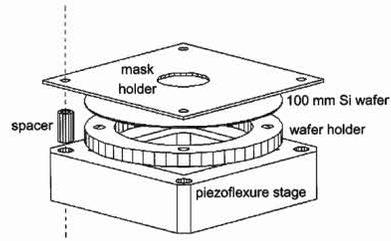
Fixture assembly for nanotranslated stencil mask and substrate. Parts from top to bottom include: Stencil mask holder, 100 mm Si wafer, wafer holder, spacer, and x - y flexure nanotranslation stage.
